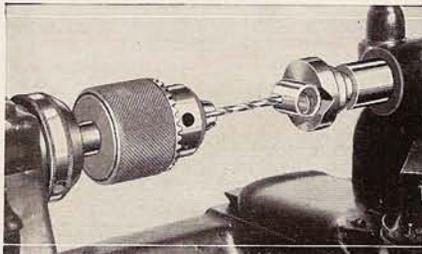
Drilling Oil Hole in a Bushing using Crotch Center in Tailstock of Lathe.
